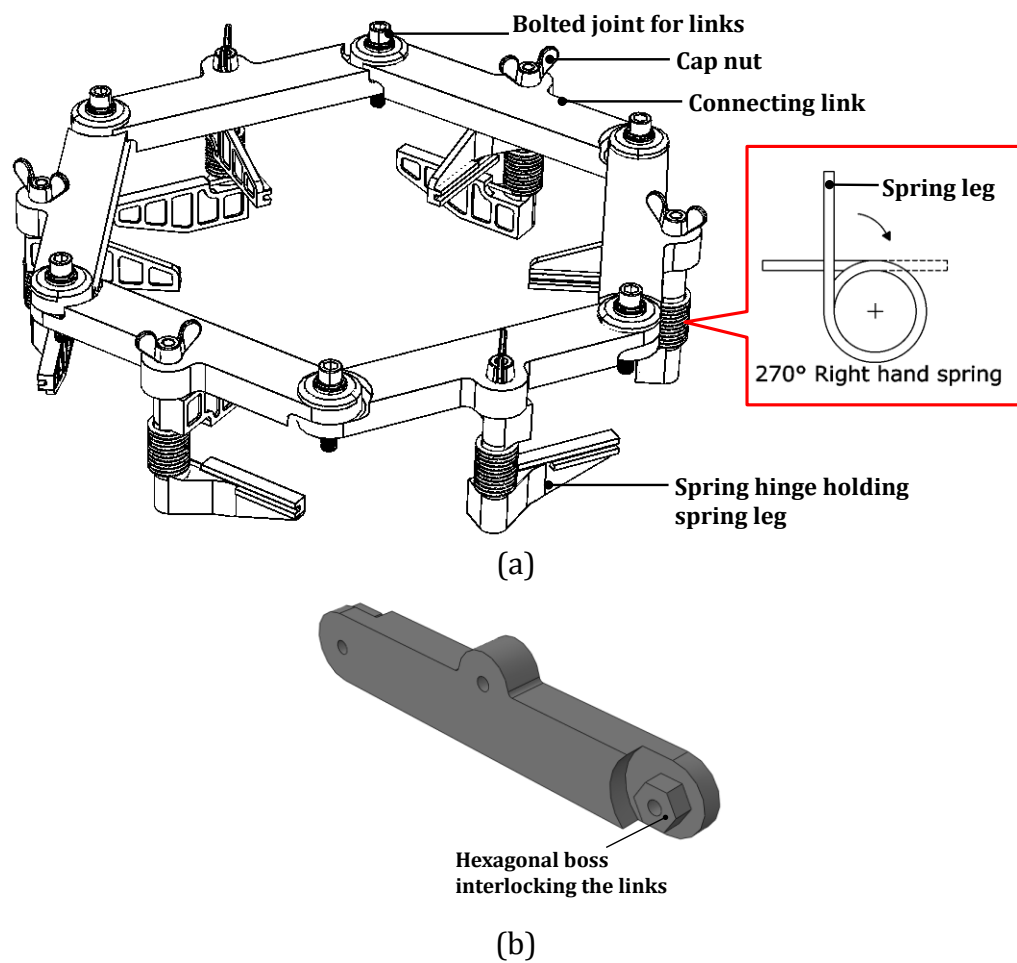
(a) Torsion spring fixture model (b) connecting link with internal hexagonal locking mechanism
